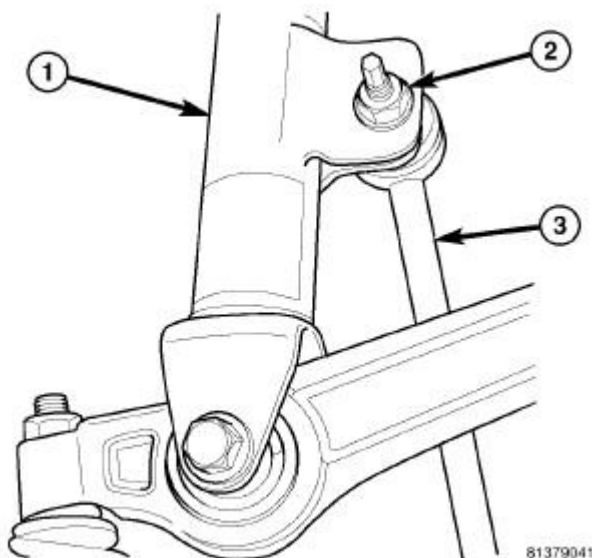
STABILIZER LINK AT SHOCK ASSEMBLY
